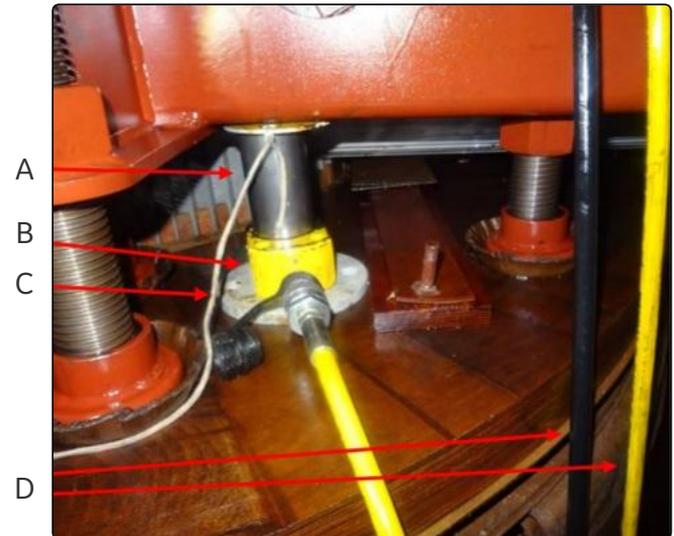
Example with one of the four hydraulic jacks in position between the clamping beam and the top winding platform, with load spreader to distribute the pressure. All four hydraulic lines were brought in through the HV turret.
